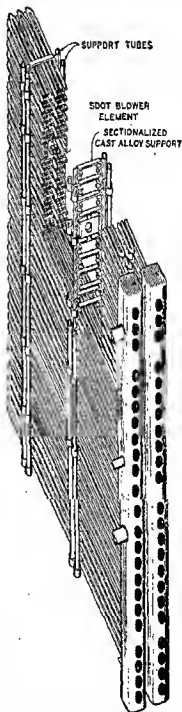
Forged return-bend superheater as applied to a two-drum bent-tube boiler.
